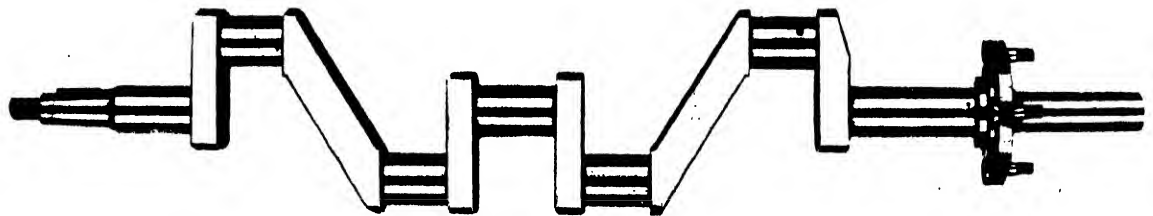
Crank Shaft of Wolseley Four-cylinder Engine
